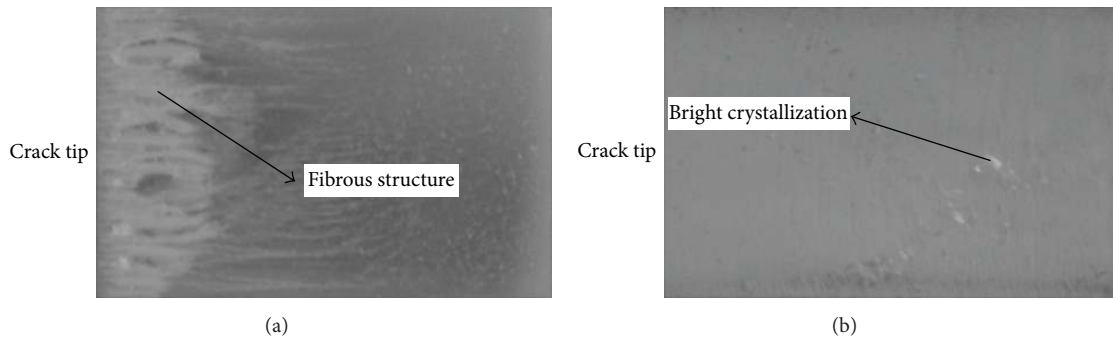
Macroscopic fracture morphology: (a) fracture morphology of the horizontal specimen; (b) fracture morphology of the vertical specimen.
